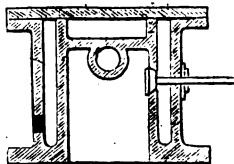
Sectional Plan of Trusty Vaporiser.
